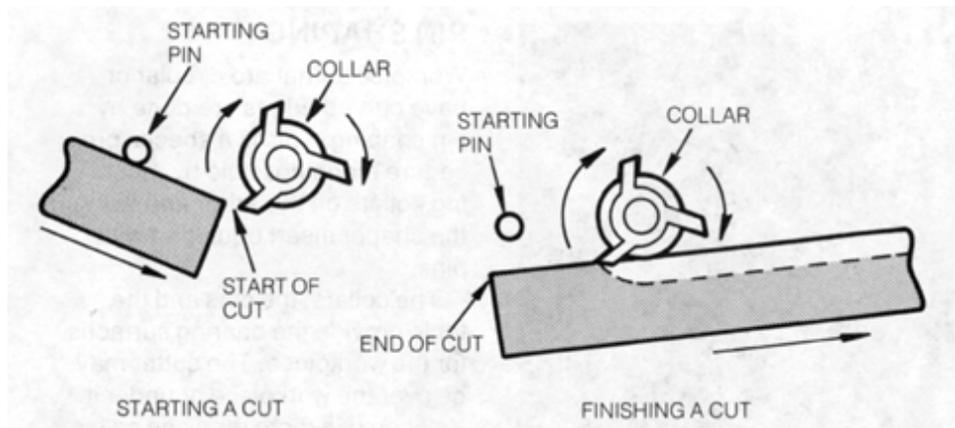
The workpiece is first braced against the left pin and slowly advanced to contact the cutter.
